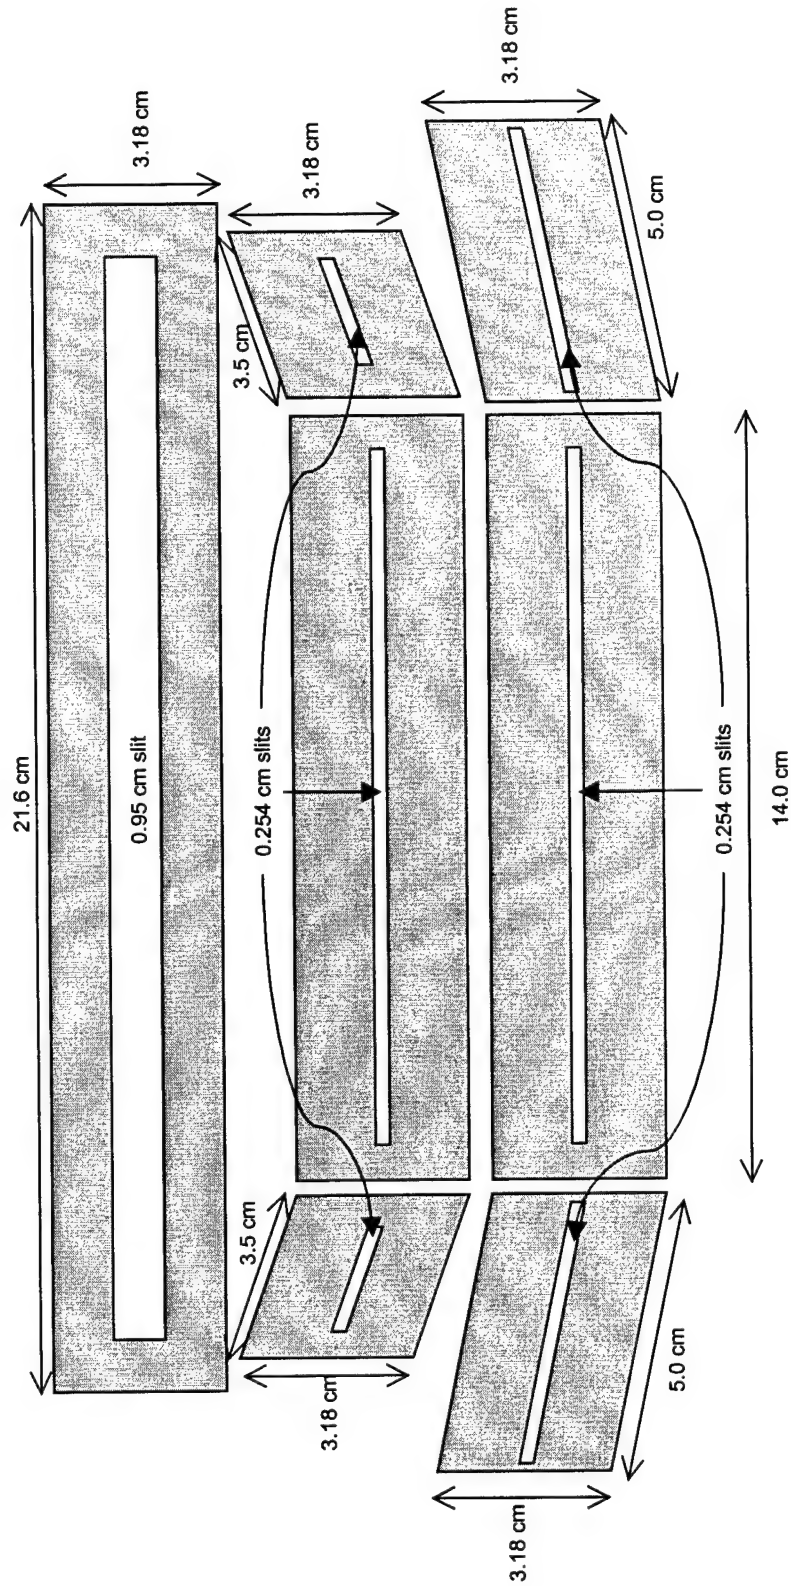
Dimensions of the Collimator Plates. All plates are machined from tin sheet metal and are 0.3175 cm in thickness
